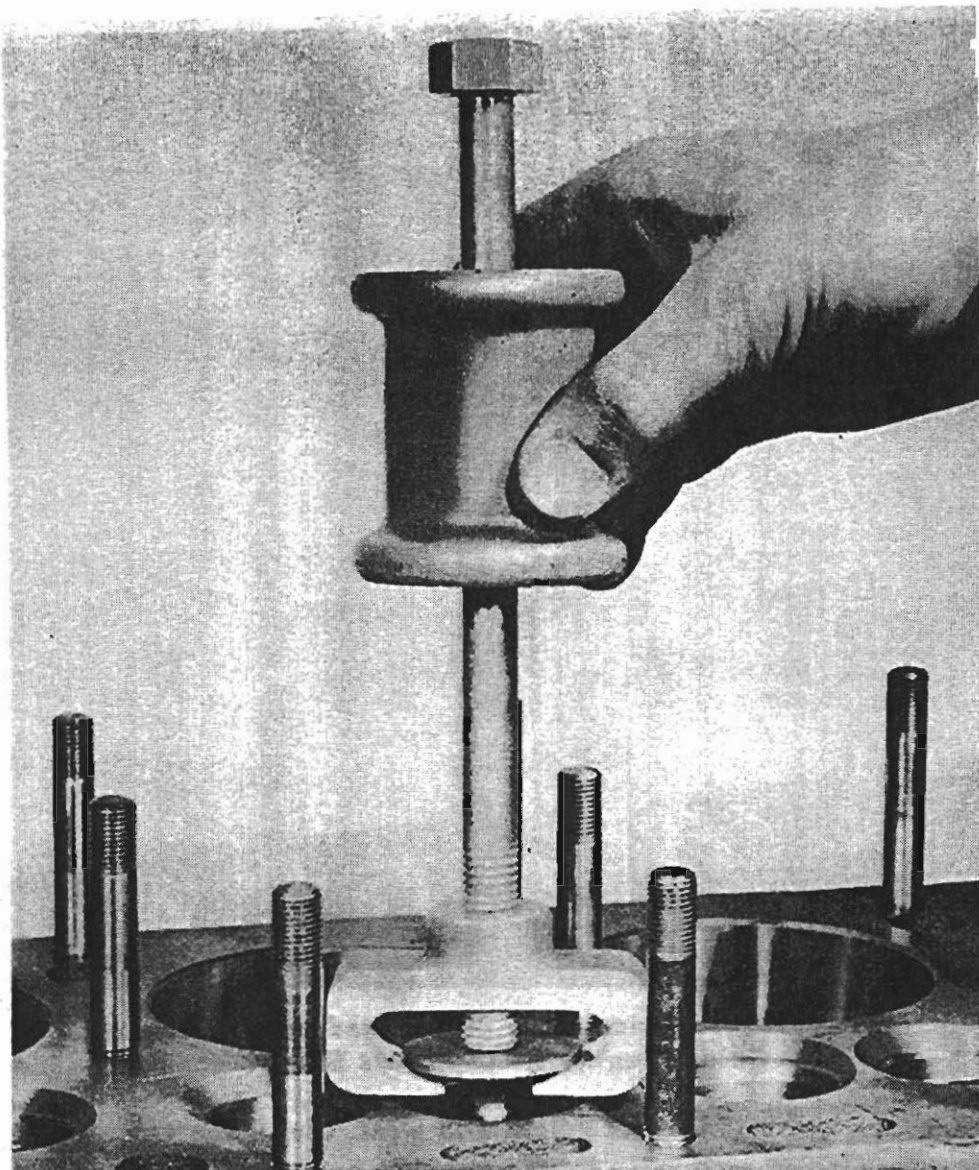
Tight Valve Remover J-2153 Will Facilitate Removal When Valves Have a Carbon, Gum, or Rust Build-Up.
